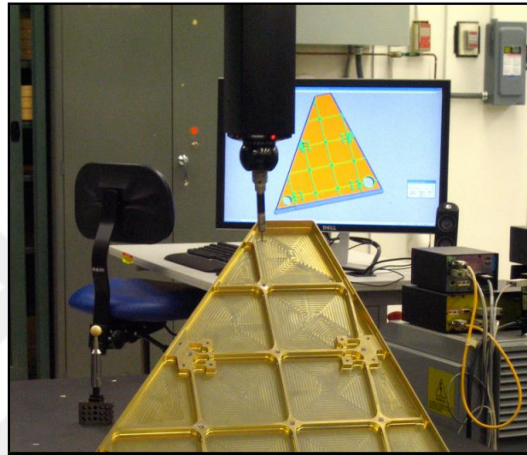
Coordinate Measuring Machine (CMM) [37]
